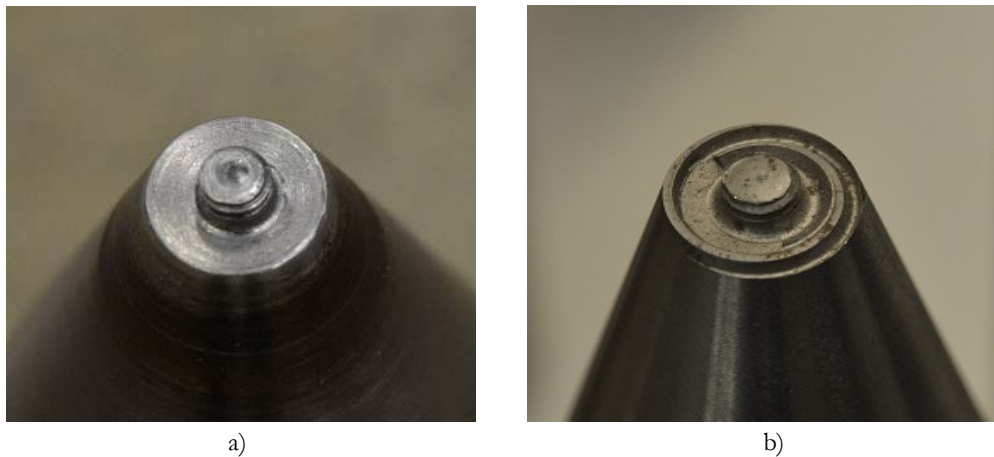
Schematic showing the welding tools for friction stir lap welding. a) Tool E b) Tool G.
